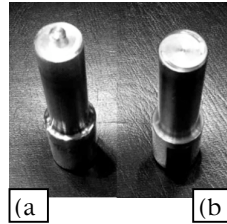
A photograph of the tool shape (a) case 1 and 3, (b) case 2
